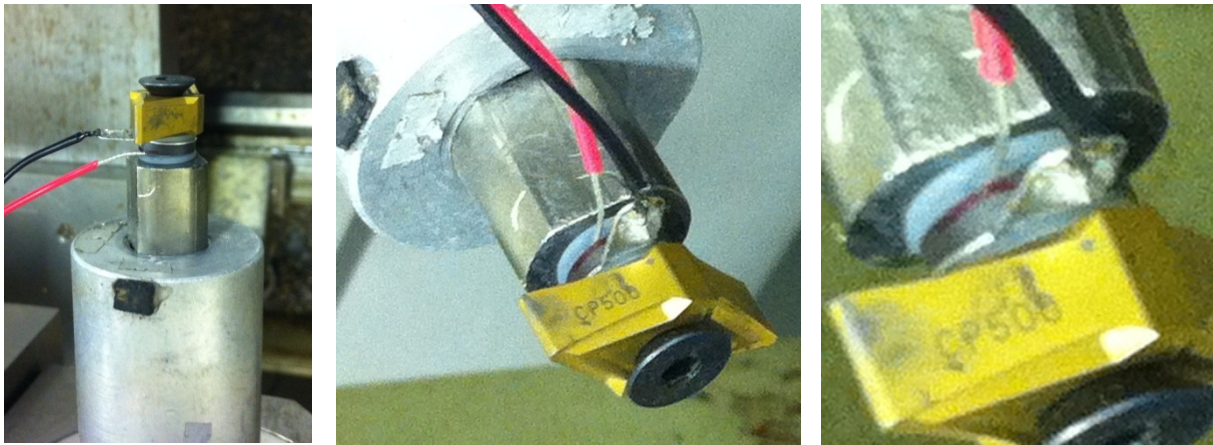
Peak force sensor, first prototype with Teflon insulators; mounted on the cutting head [see Figure 6-9]
